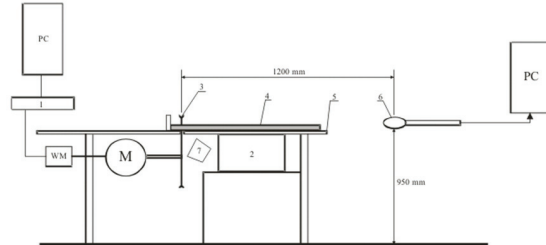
Experimental setup: 1 – cutting power measuring-acquisition device; 2 – feeding device; 3 – circular saw blade; 4 – workpiece; 5 – feeding carriage; 6 – microphone; 7 – exhauster receiver; M – drive motor; WM – wattmeter.
